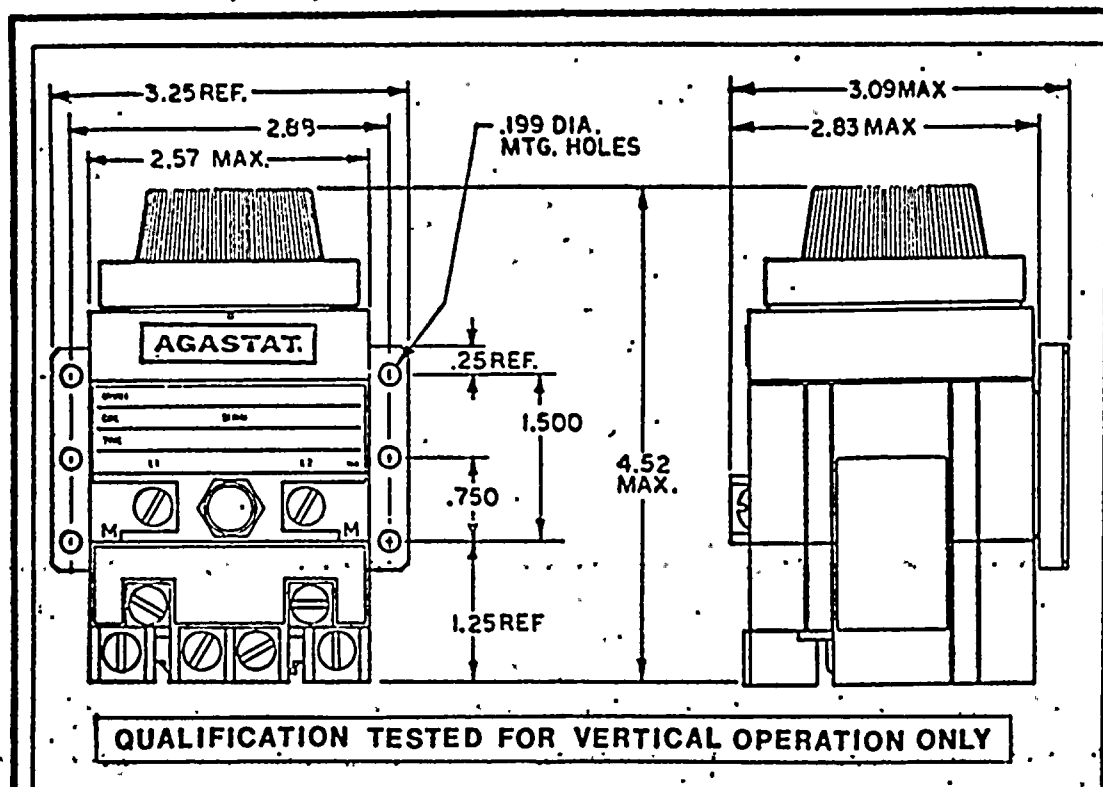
Model E7012 and E7022 Outline and Dimension Drawing.
